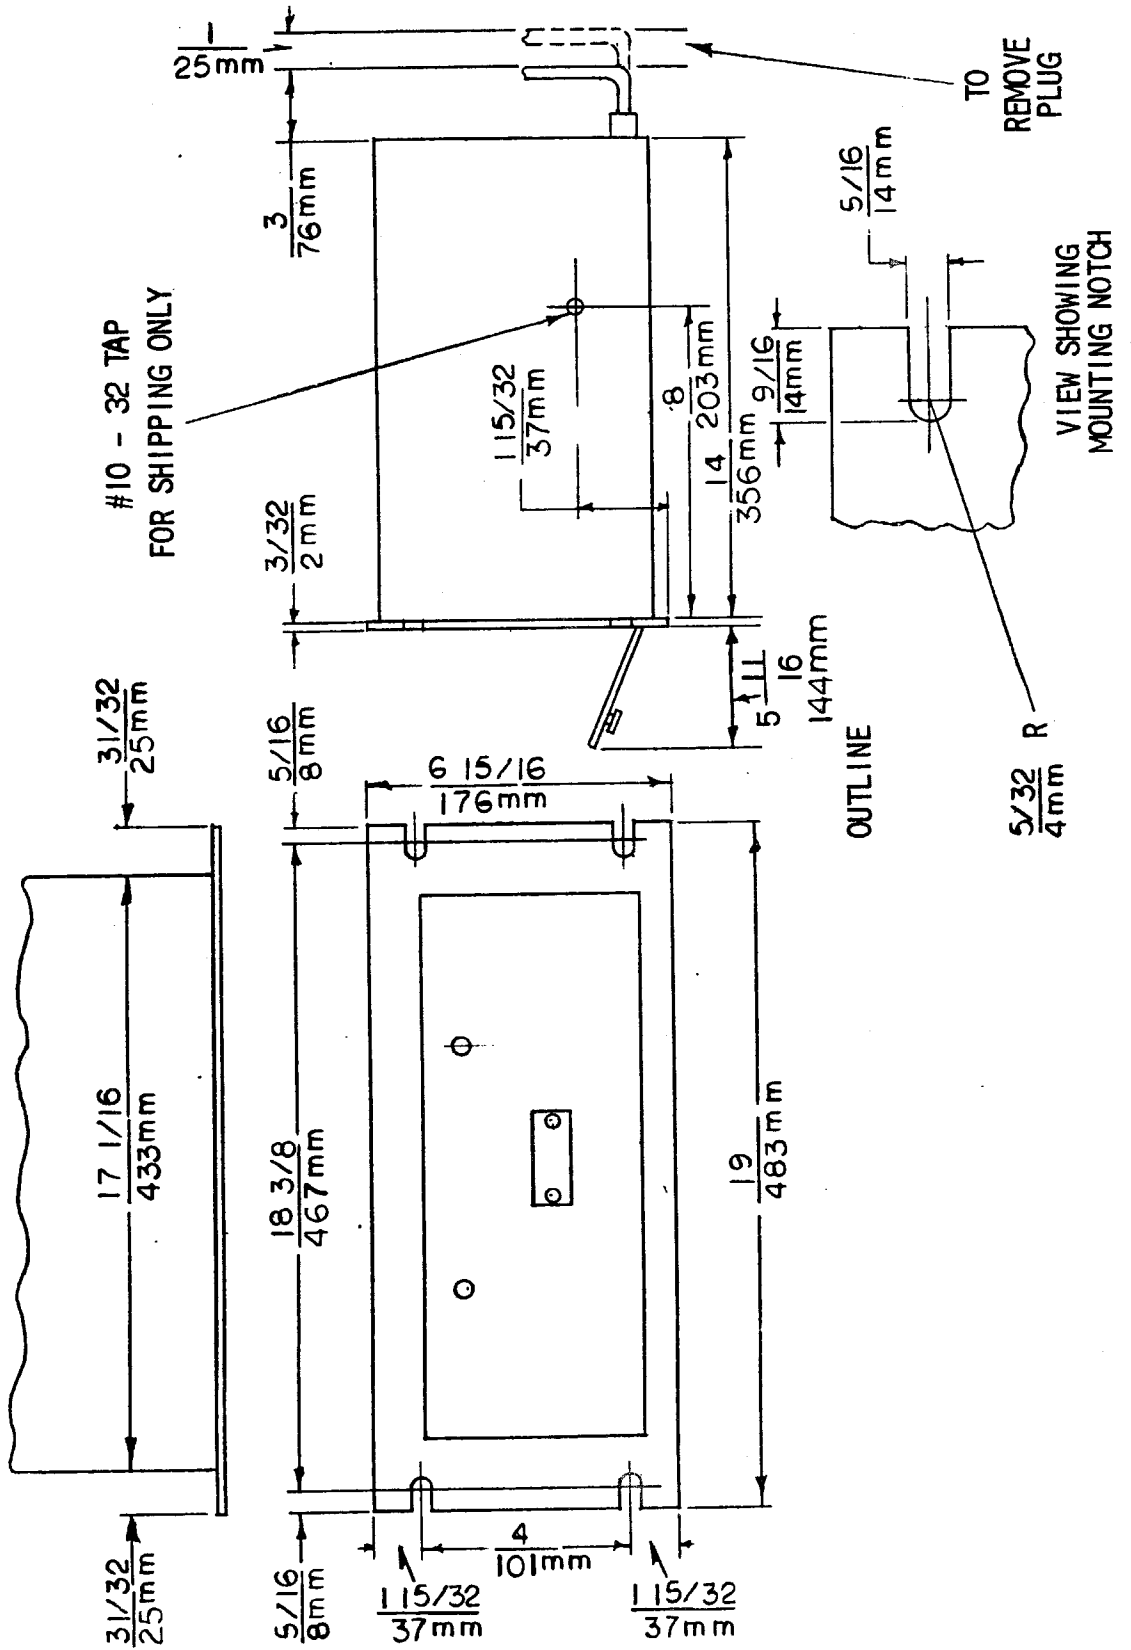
(0227A2037-0) Outline and Mounting Dimensions
